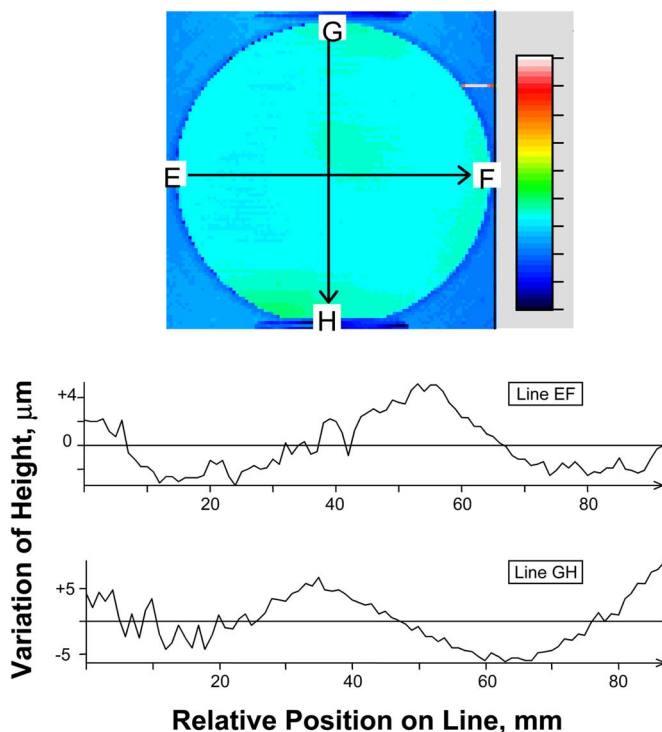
Laser surface imaging profile of wafer fixture II: Surface variation of wafer in pocket drawn down by vacuum.
